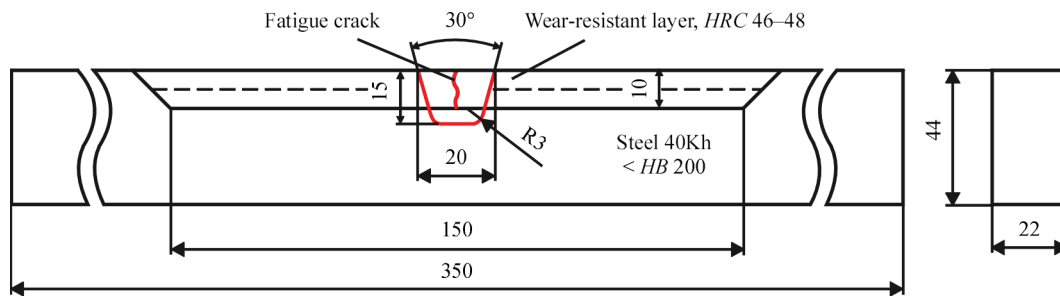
Scheme of preparation of metal damaged by fatigue cracks
